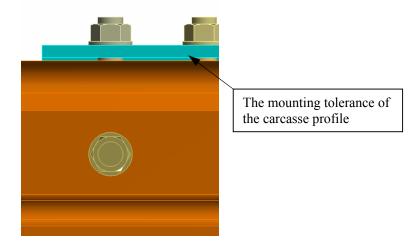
Modeling of the contact with tolerances between surfaces
